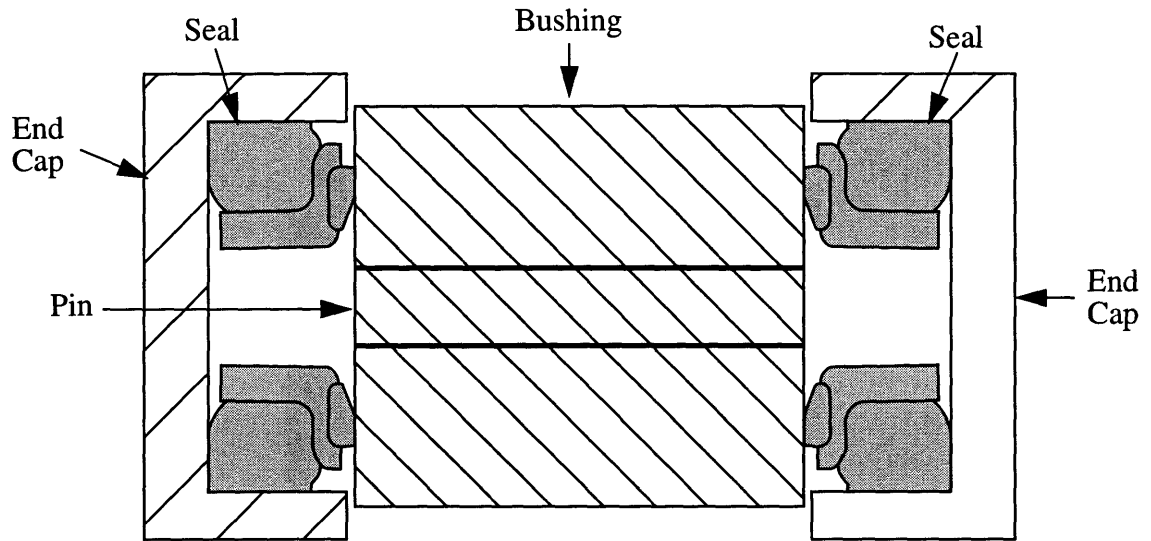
Pin Assembly (cross-sectional view). [14]
